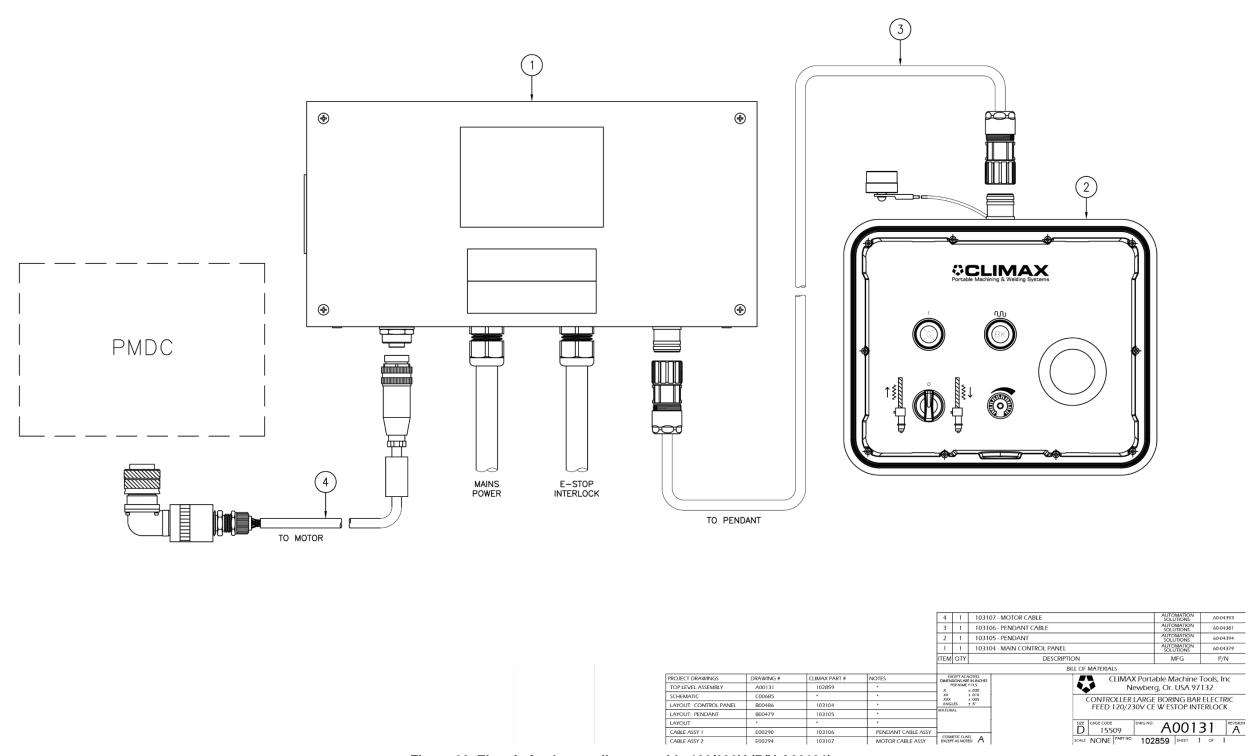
Electric feed controller assembly 120/230V (P/N A00131)
